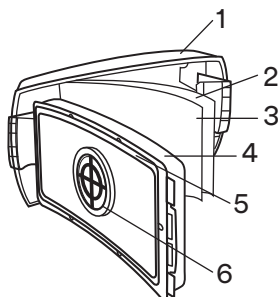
1. Filter cover, 2. Spark arrester/prefilter OR 3. Prefilter, 4. HE filter, 5. Outer barrier, 6. Inner gasket
